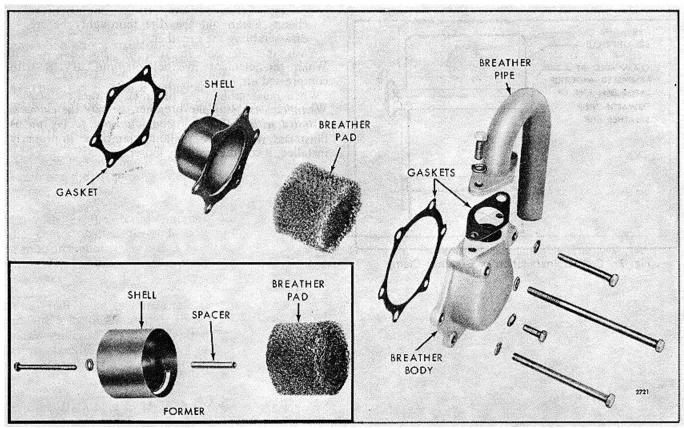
Flywheel Housing Mounted Breather Assembly Details and Relative Location of Parts
